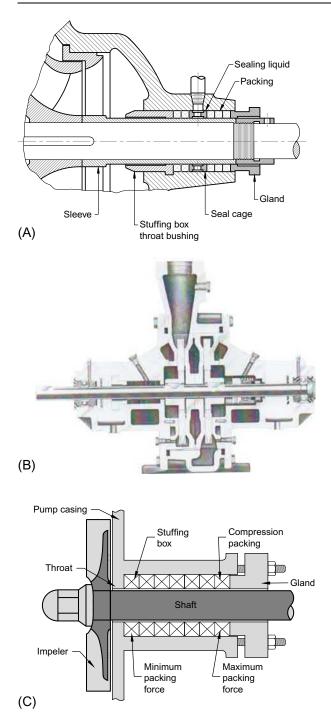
(A) Conventional stuffing box with bottoming ring. (B) Cutaway of a centrifugal pump illustrating the stuffing box and packing. (C) Stuffing box assembly.
